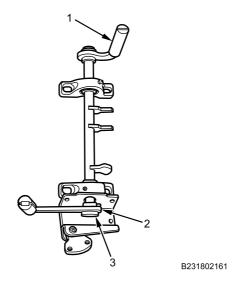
Interior Handle Shaft Assembly Installation on Inner Door Frame.
